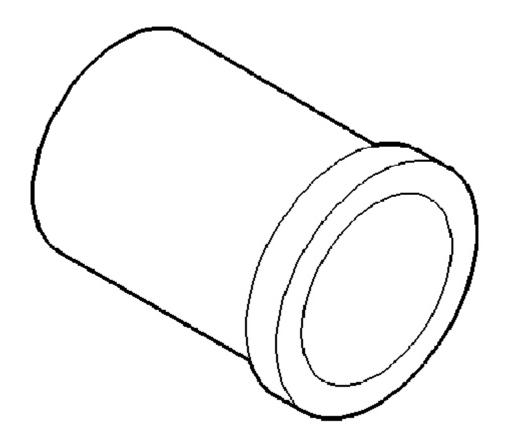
Camshaft Seal Installer MD-998306 Courtesy of CHRYSLER LLC
